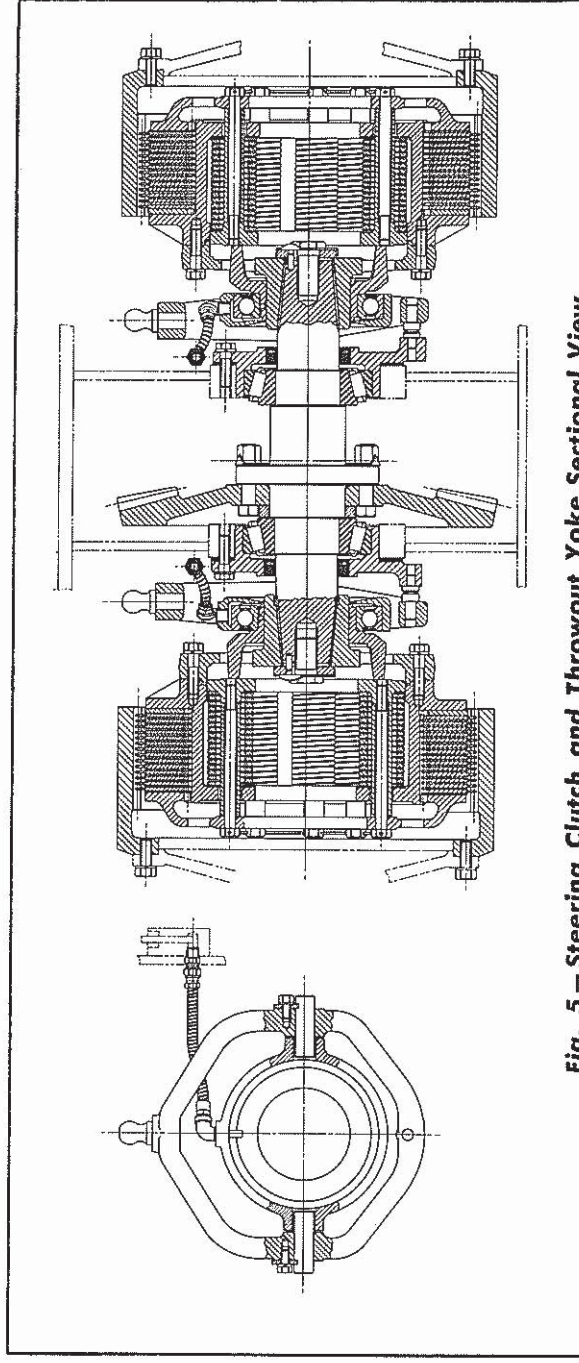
Steering Clutch and Throwout Yoke Sectional View
